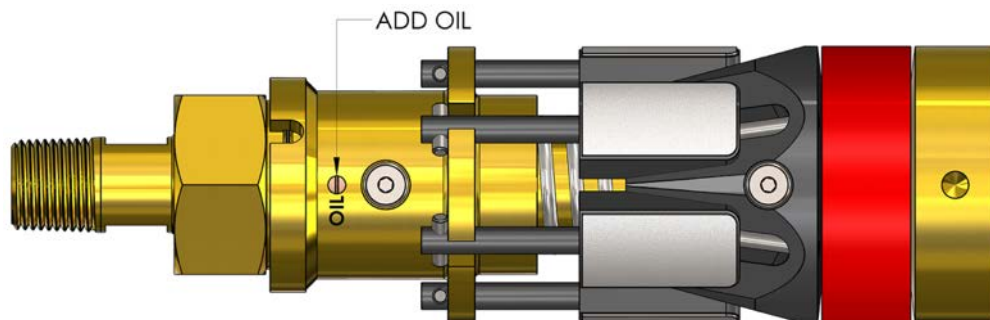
Adding Oil to the ORB Spring Plate’s Oil Hole
